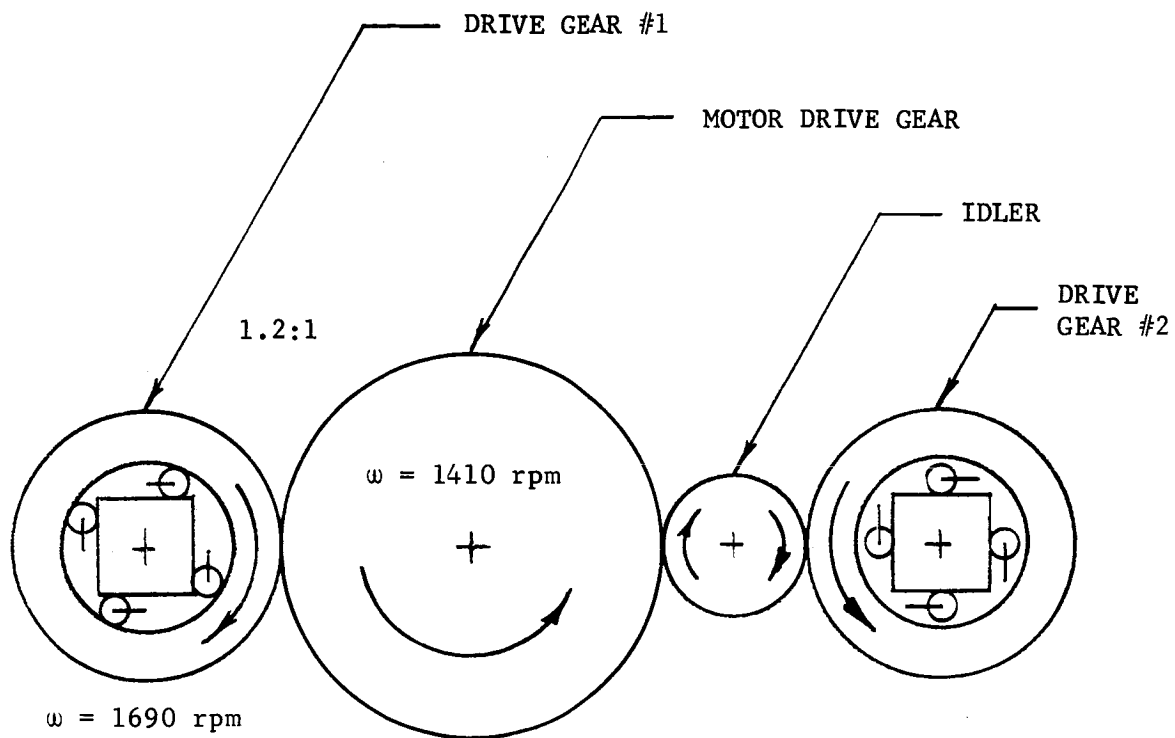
ROTARY/IMPACT DRILL ASSEMBLY, E-1
